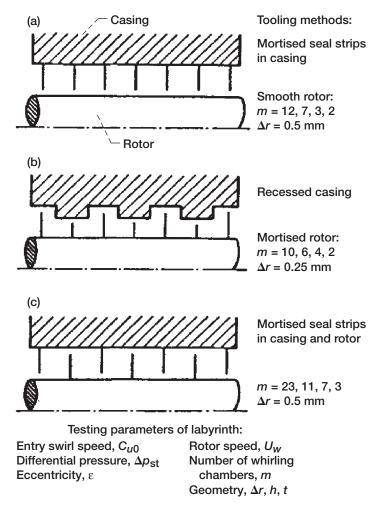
Close-clearance labyrinth shaft seals, circumferential types. (Benckert and Wachter, 1978.)
